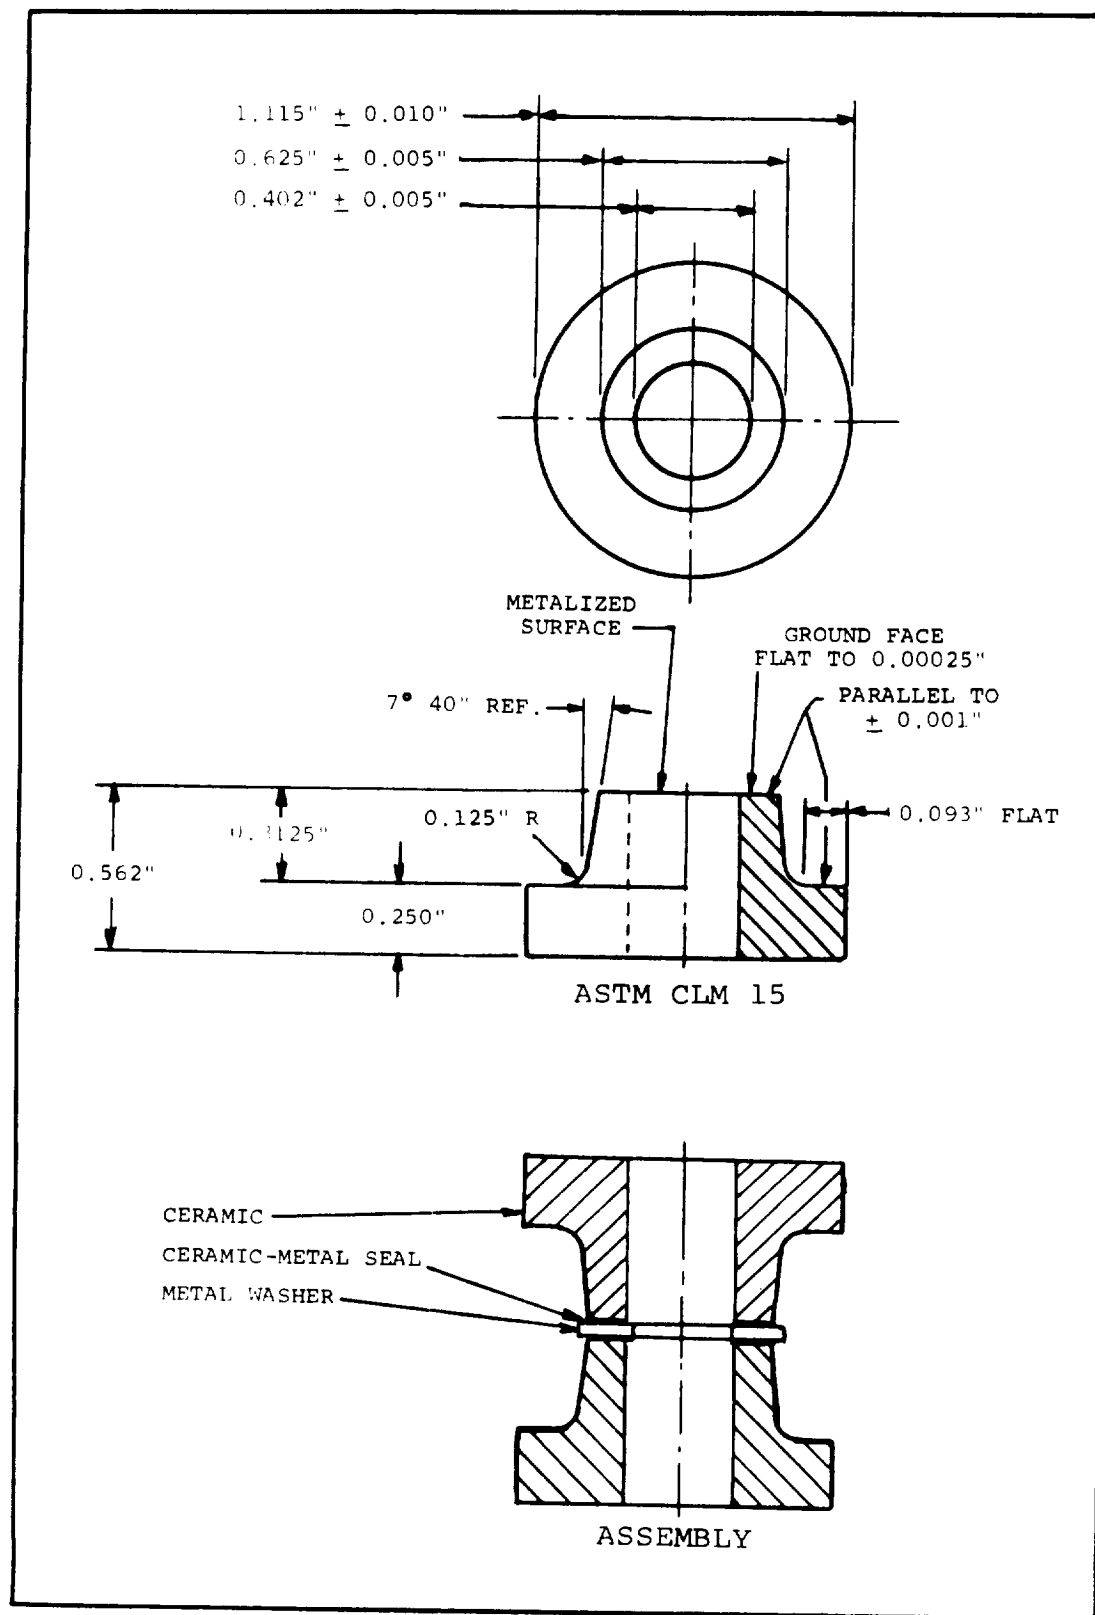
ASTM CLM 15 Specimen and Assembly
